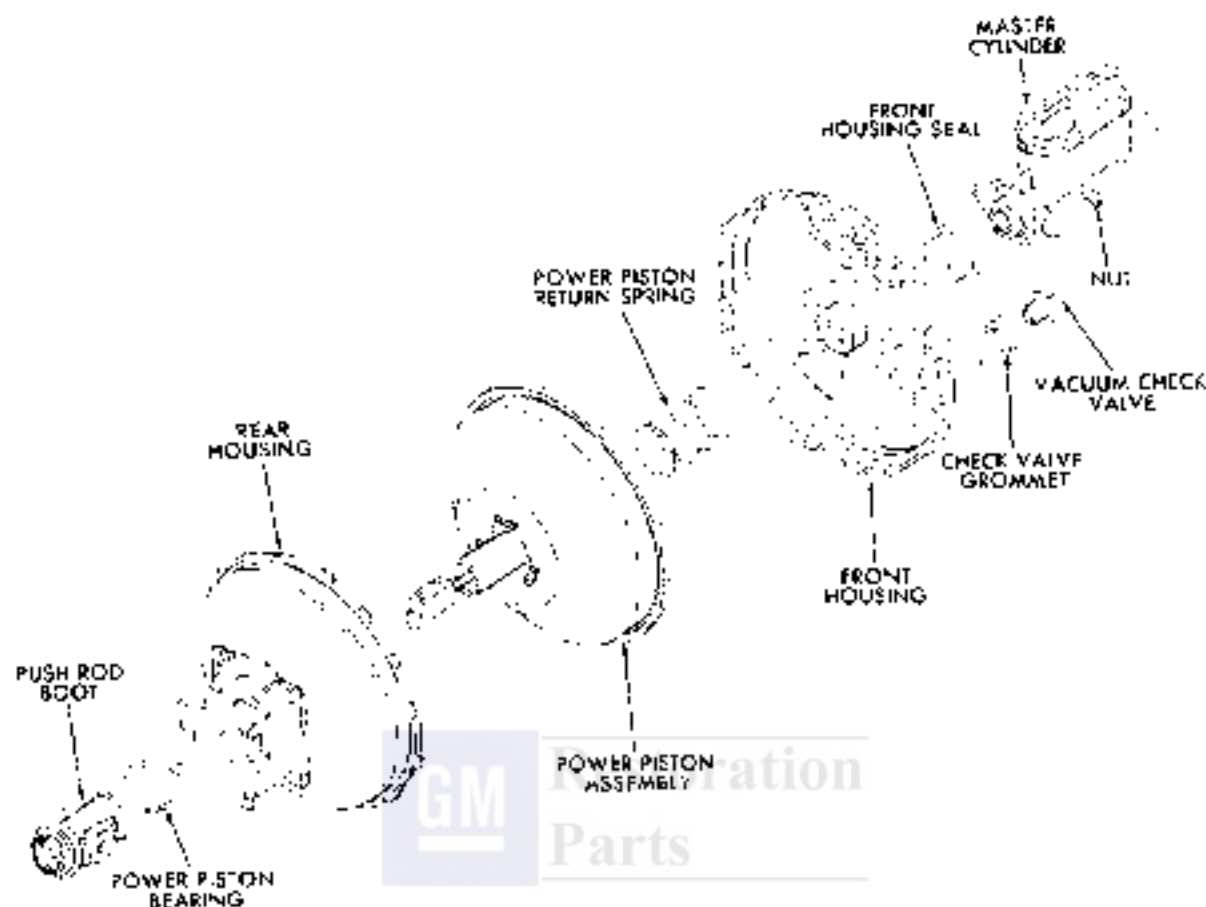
A-7 Exploded View of Front and Tensest Power Brake Unit
